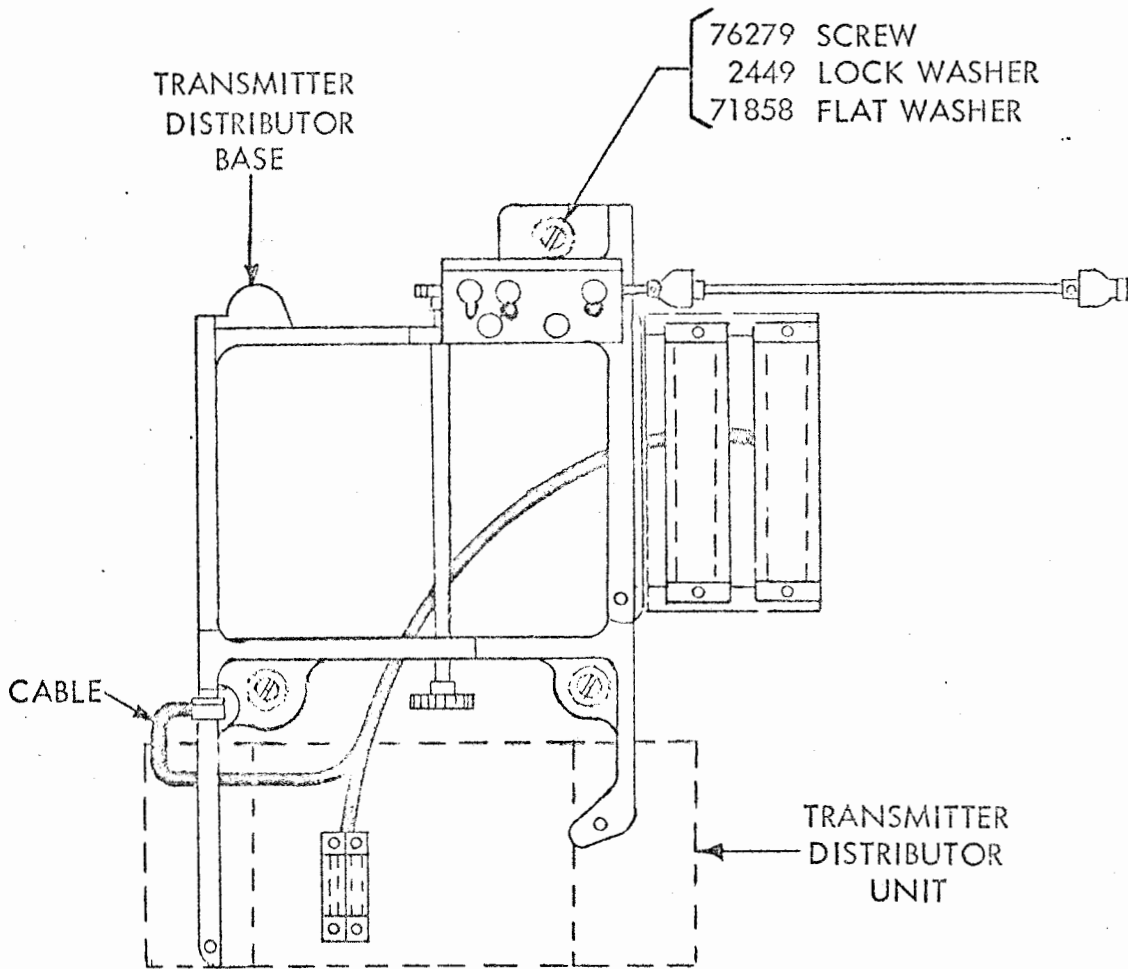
TYPICAL TRANSMITTER DISTRIBUTOR UNIT AND BASE ARRANGEMENT
